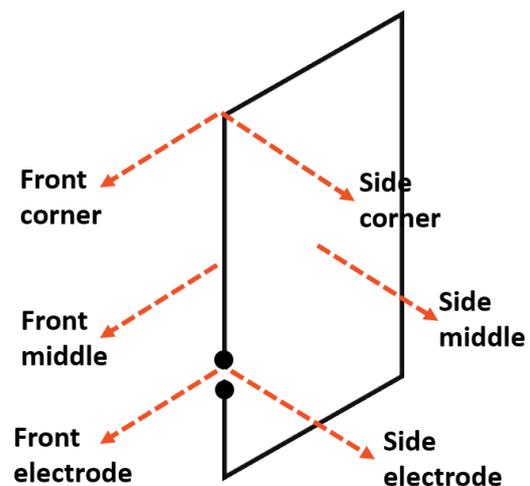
Reference measurement of a single-phase resistance welding equipment using the SMP series meter
